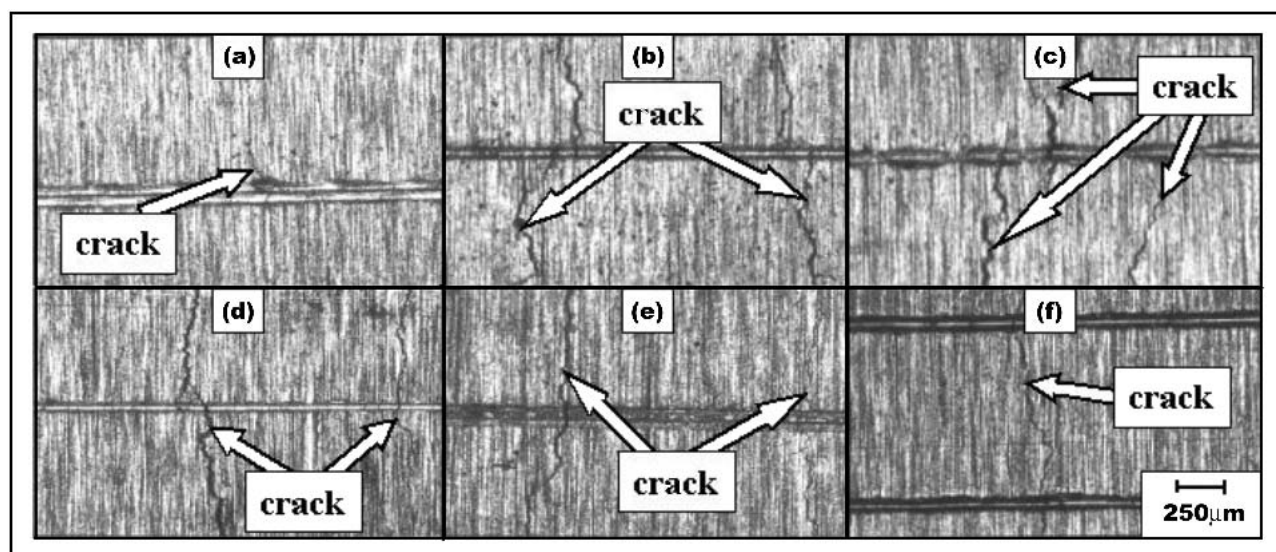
Micrographs showing the surface of the samples after performing the bend test: (a) flame-fused Ø50 mm, (b) flame-fused Ø70 mm, (c) flame-fused Ø100 mm, (d) induction-fused Ø50 mm, (e) induction-fused Ø70 mm, and (f) induction-fused Ø100 mm
